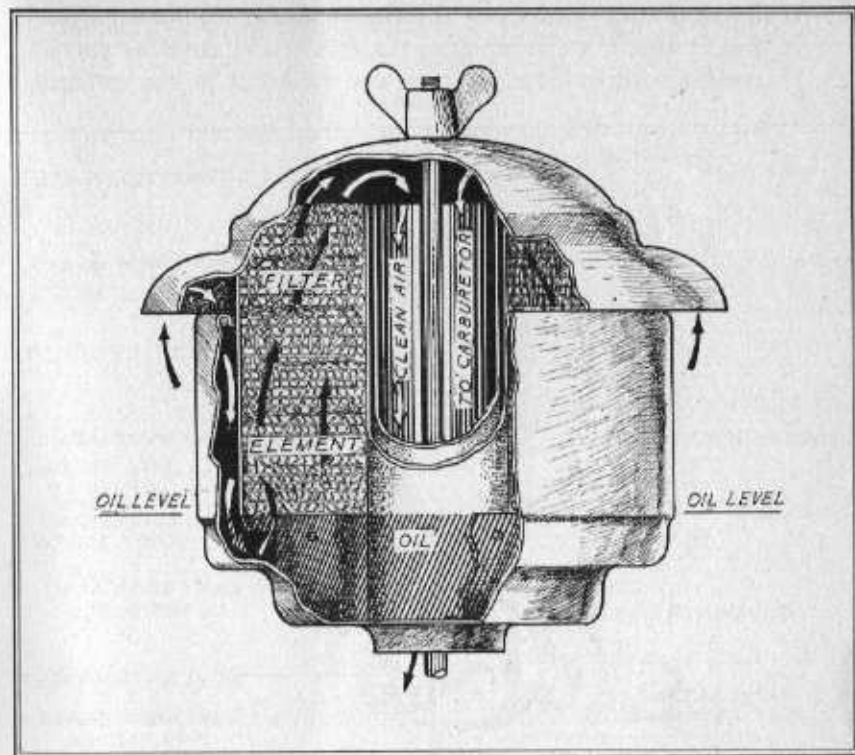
SECTIONAL VIEW OF AIR CLEANER
